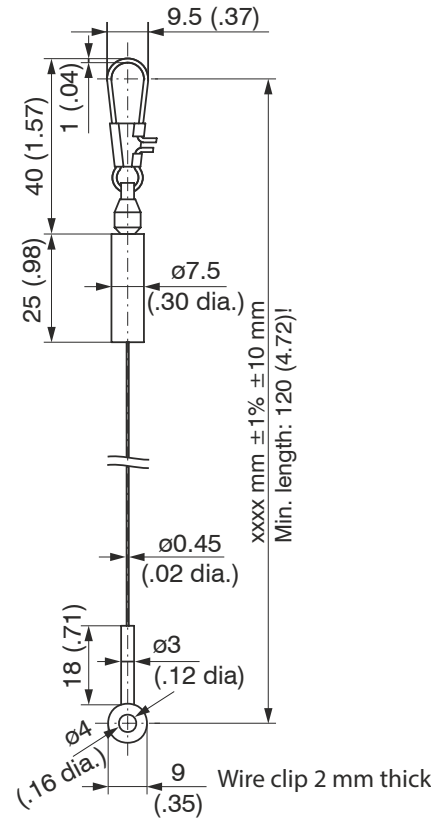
Wire extension WE-xxx-CLIP, dimensions in mm (inches), not to scale
